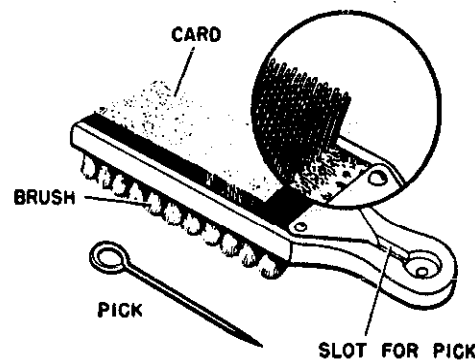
A file cleaner. When cleaning a file with a file cleaner, lay it flat on a bench and draw the cleaner across it parallel with the cuts of the file.
